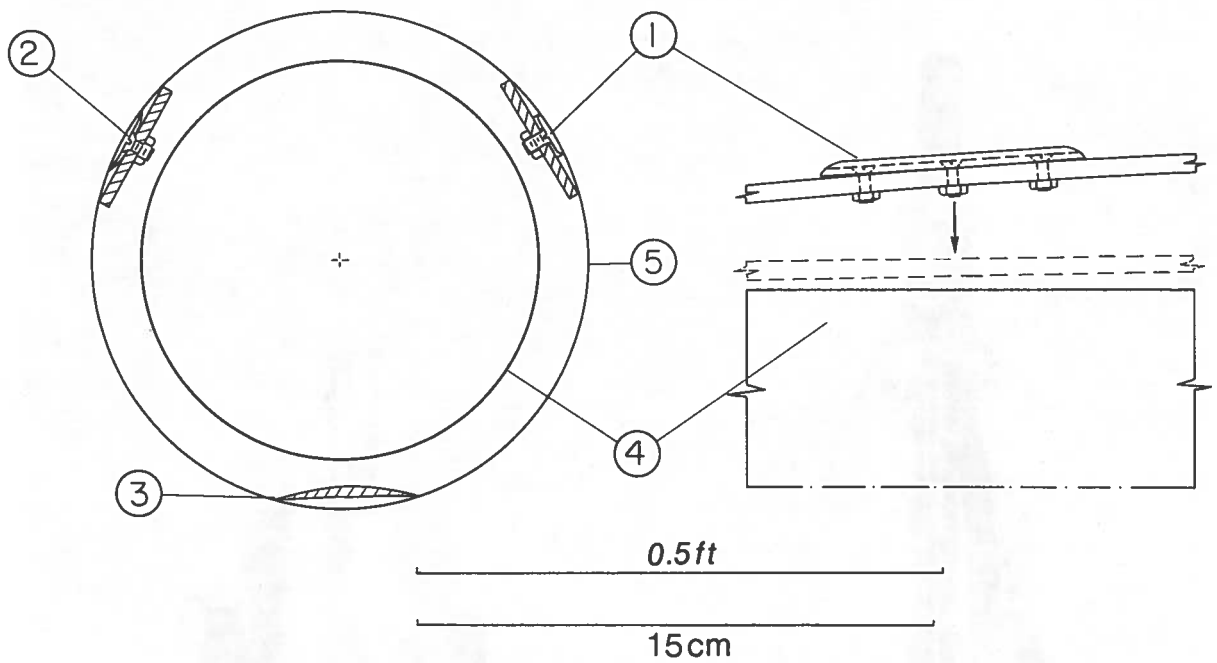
Ice blade attachments to anti-torque plate springs. (1) Passive blade. (2) Active blade (spring steel). (3) Alternate plate spring shape. (4) Motor casing or extension tube (5) Bore hole wall.
